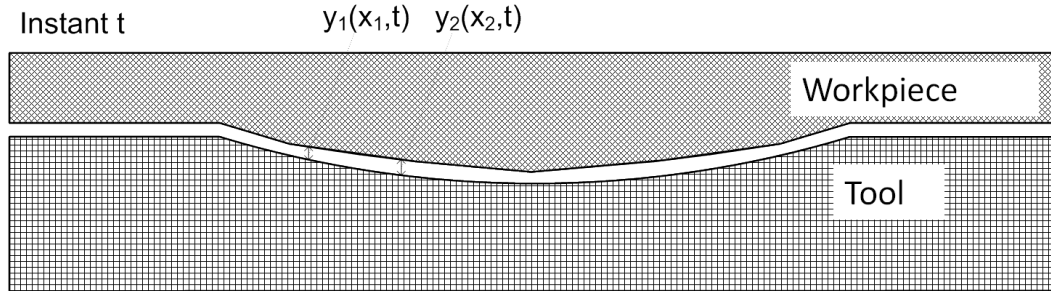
Tool-workpiece distance in case of the workpiece enters a tool pocket.
